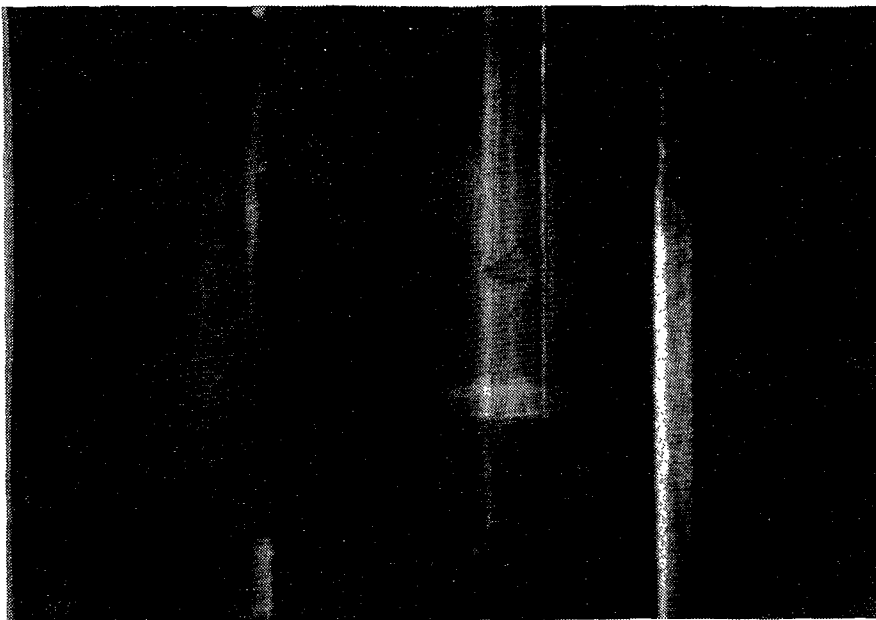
FRETTING FAILURES NEAR A BOTTOM END PLUG
